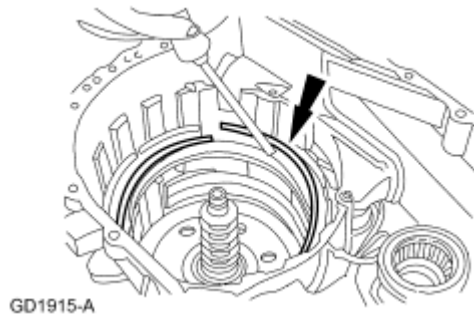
Low/Reverse Clutch Return Spring Retaining Ring
